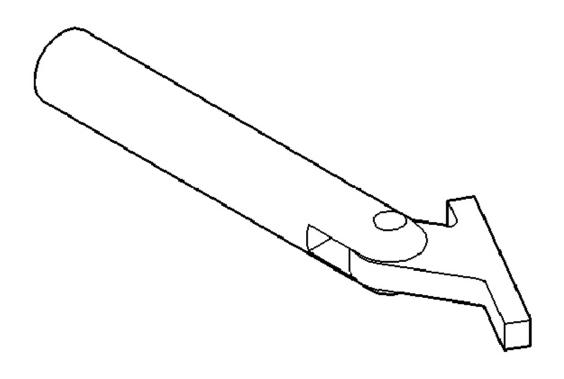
Main Bearing Remover/Installer C-3059 Courtesy of CHRYSLER LLC
